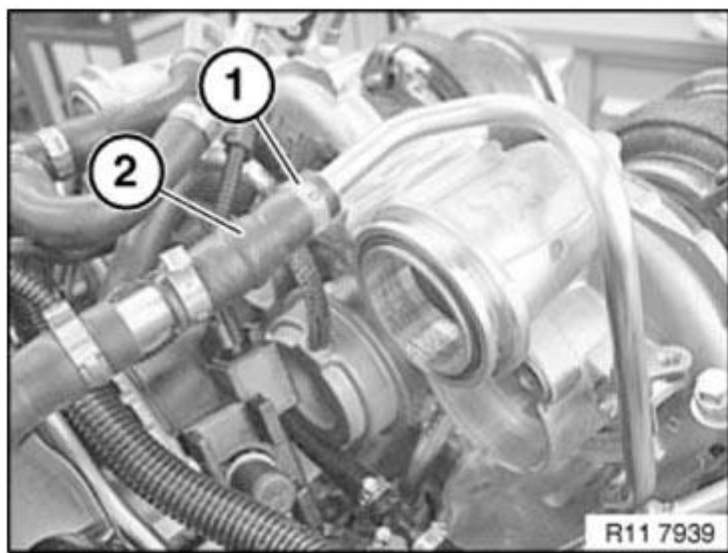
Identifying Coolant Feed Line And Hose Clamp
